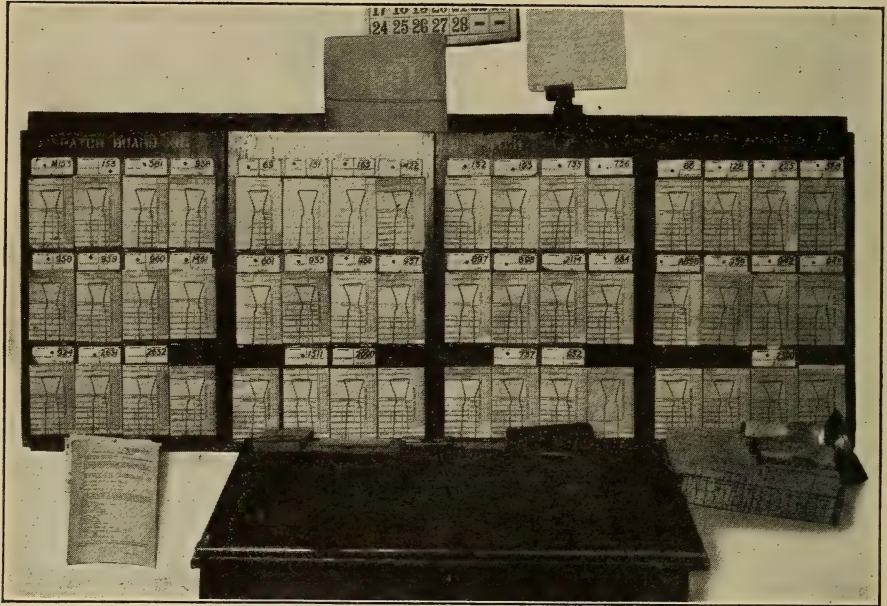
A MACHINE SHOP DISPATCH BOARD
